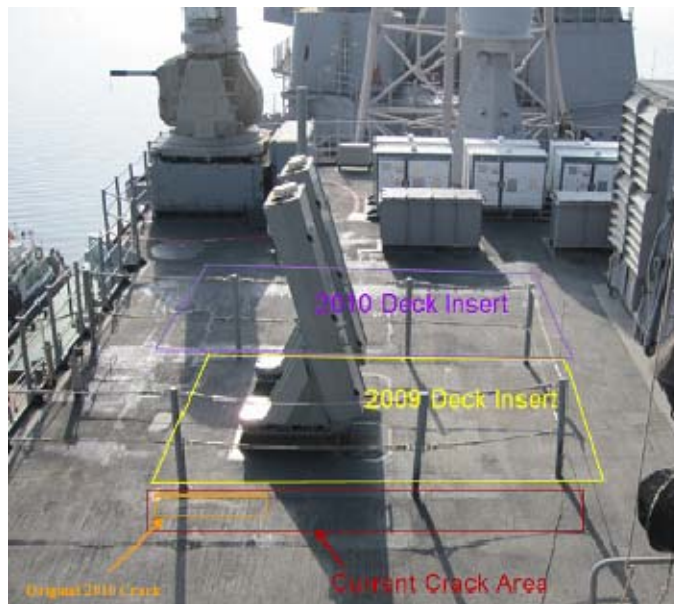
USN Cruiser 04 deck. Crack along welds from deck inserts.
